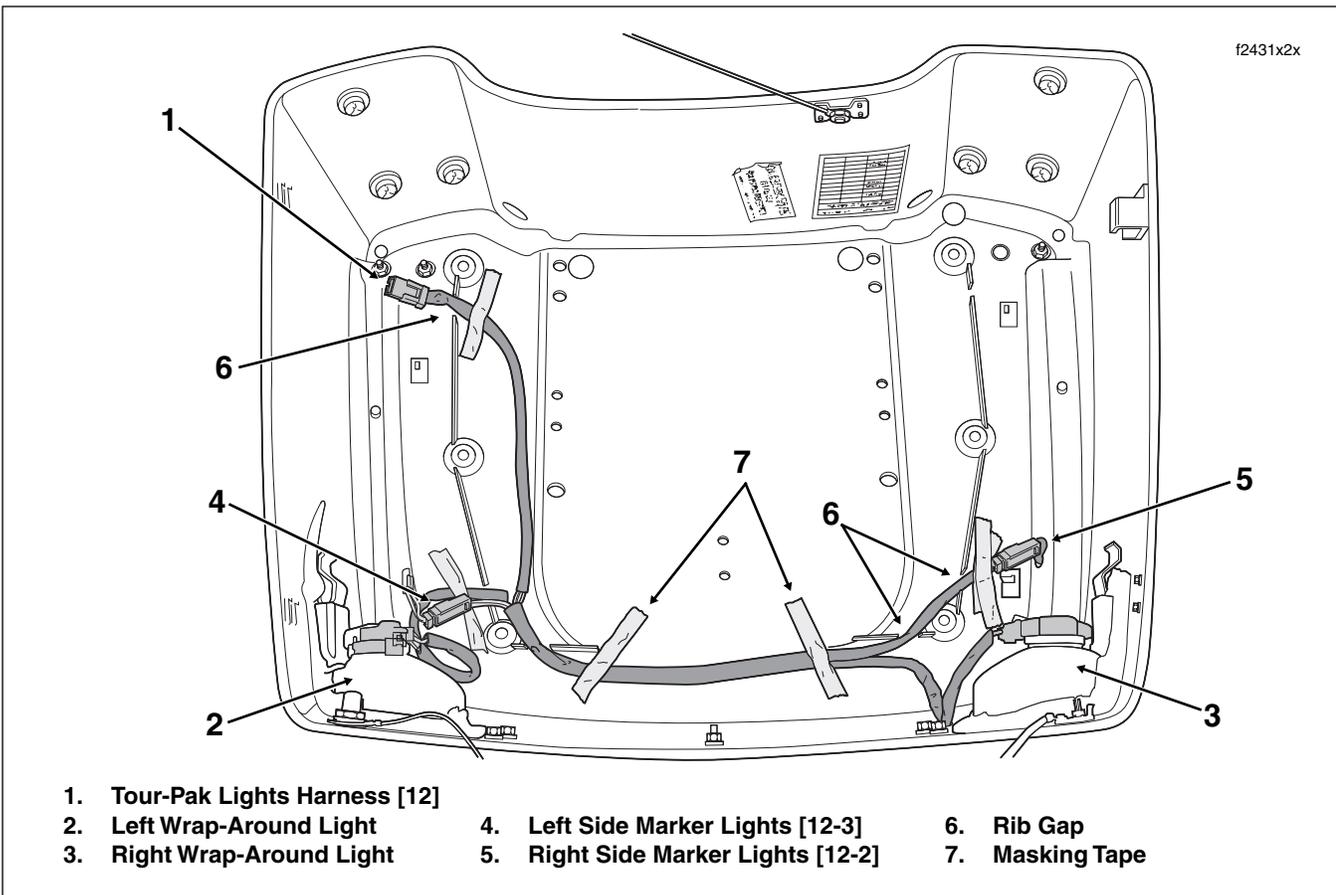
Tour-Pak Lights Harness (FLHTCU)
